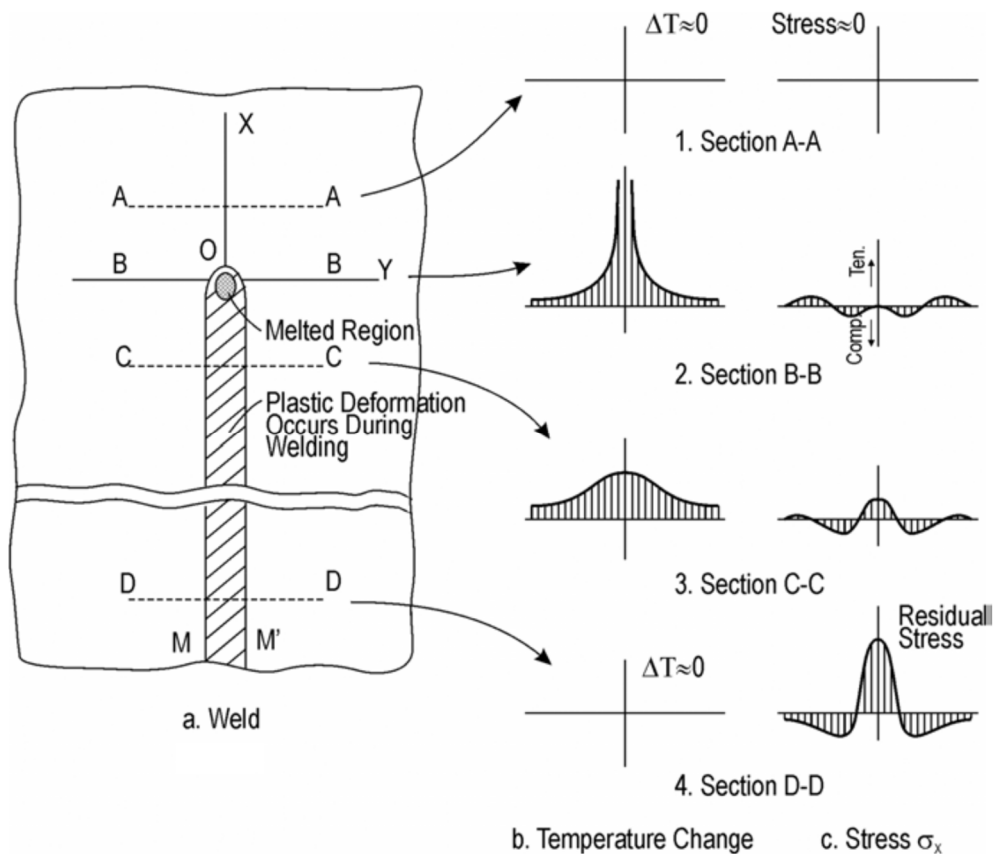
Formation of residual stresses in the workpiece during welding [15]
